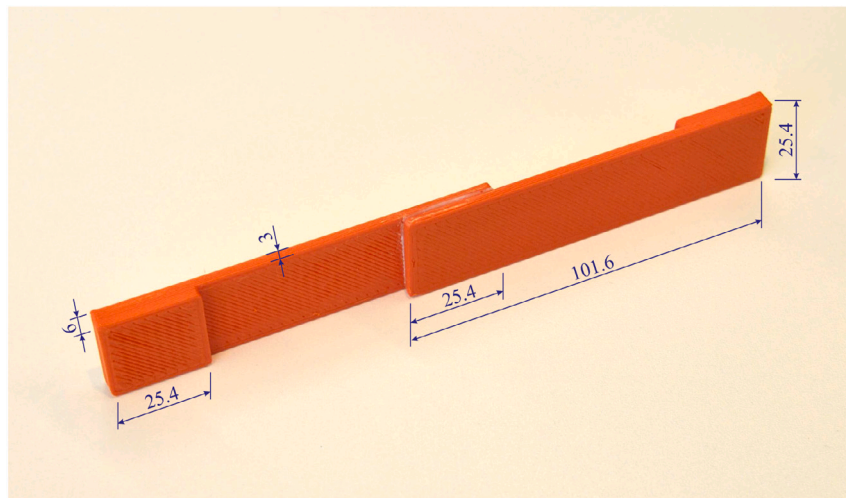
A 3D-printed single-lap joint (Dimensions in mm).
